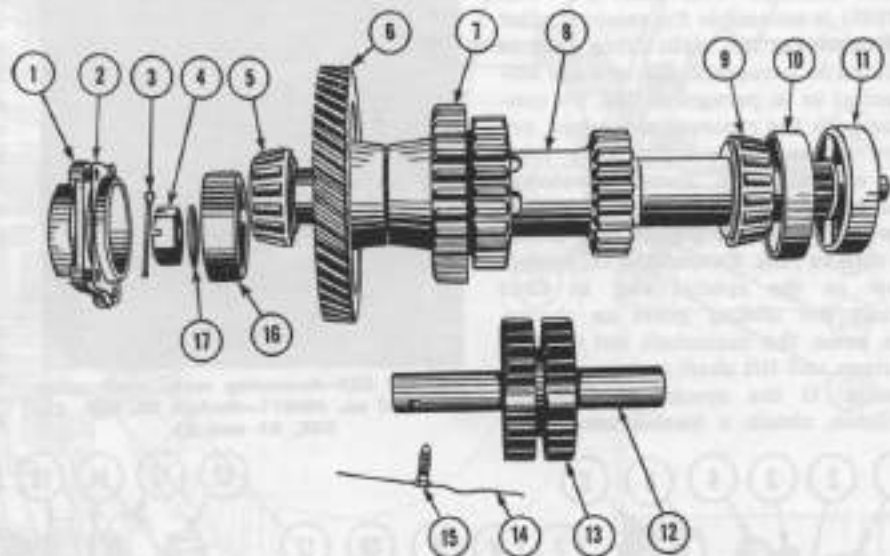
Countershaft and reverse idler gear shaft—Models 20, 20K, 22, 22K, 81 and 82.
